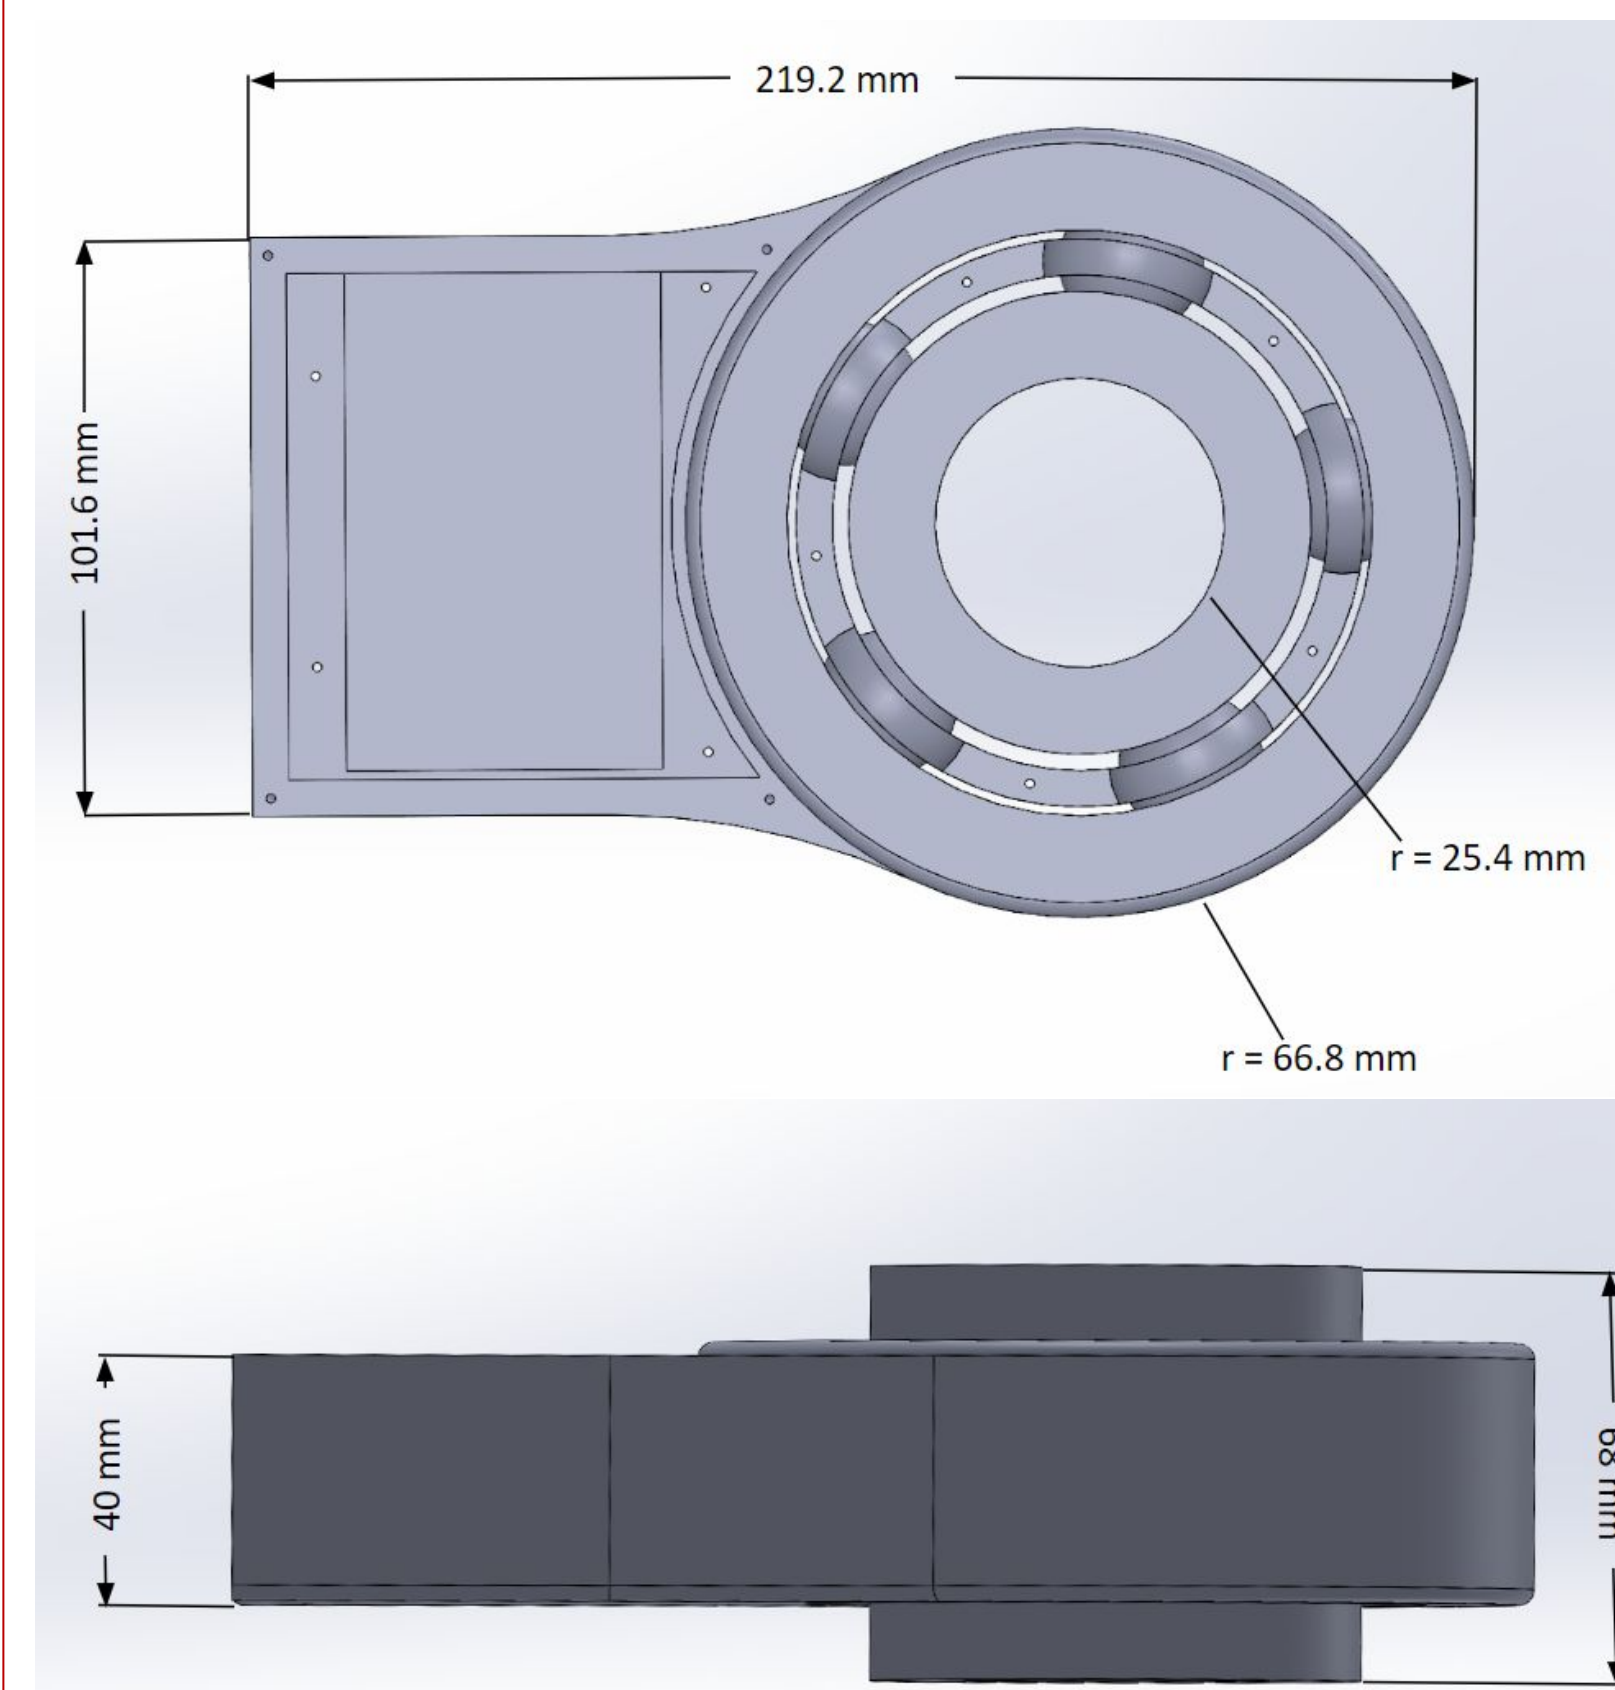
Solidworks assembly of final design with dimensions (mm), top and side views
